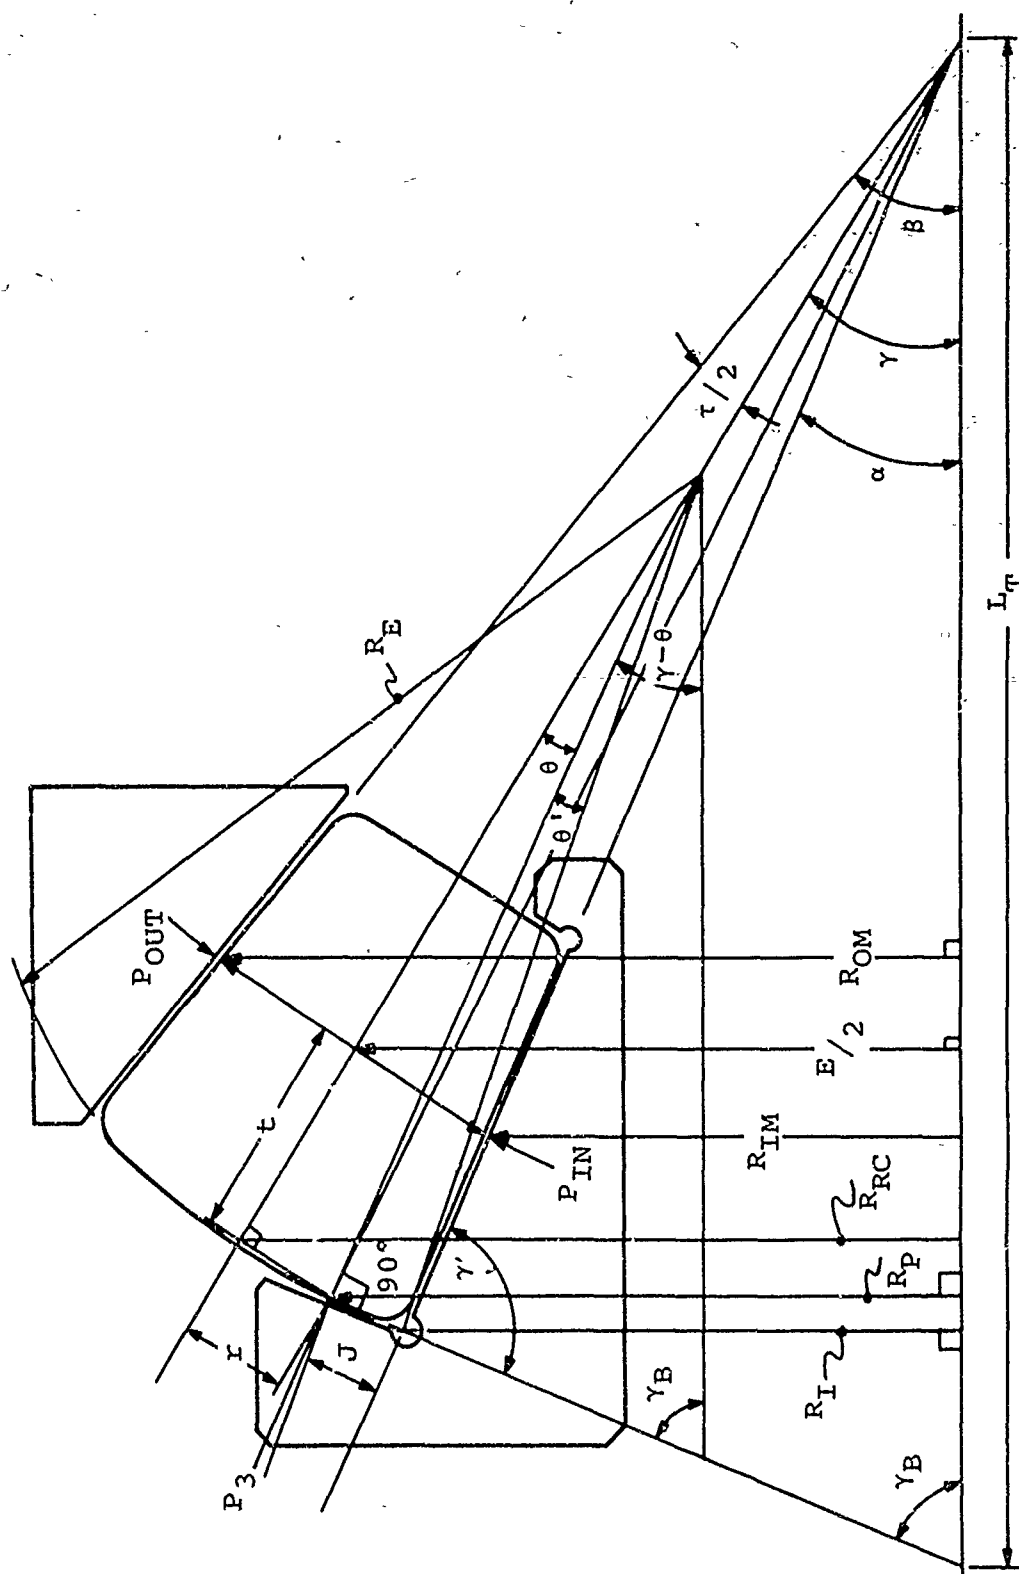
Basic Angles and Dimensions of Tapered Roller Bearing.
